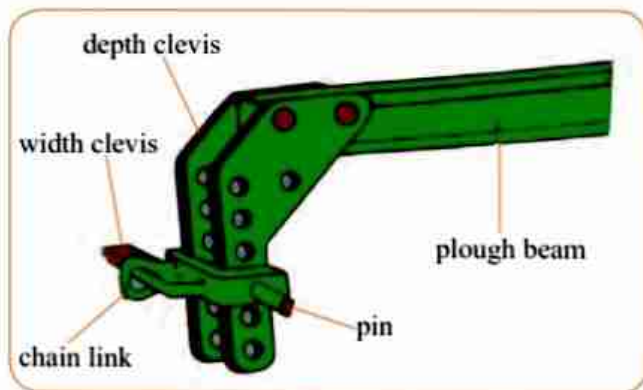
Hitch assembly with a clevis in place of a depth rod
